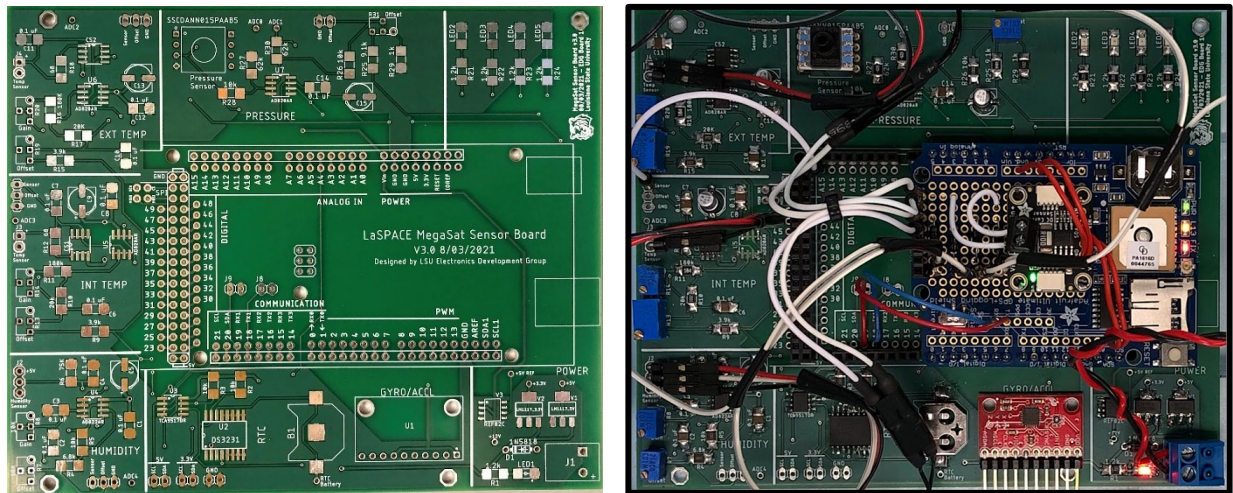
MegaSat board. Left: As Received, right: Assembled with the GPS Shield and DC Current Sensor
